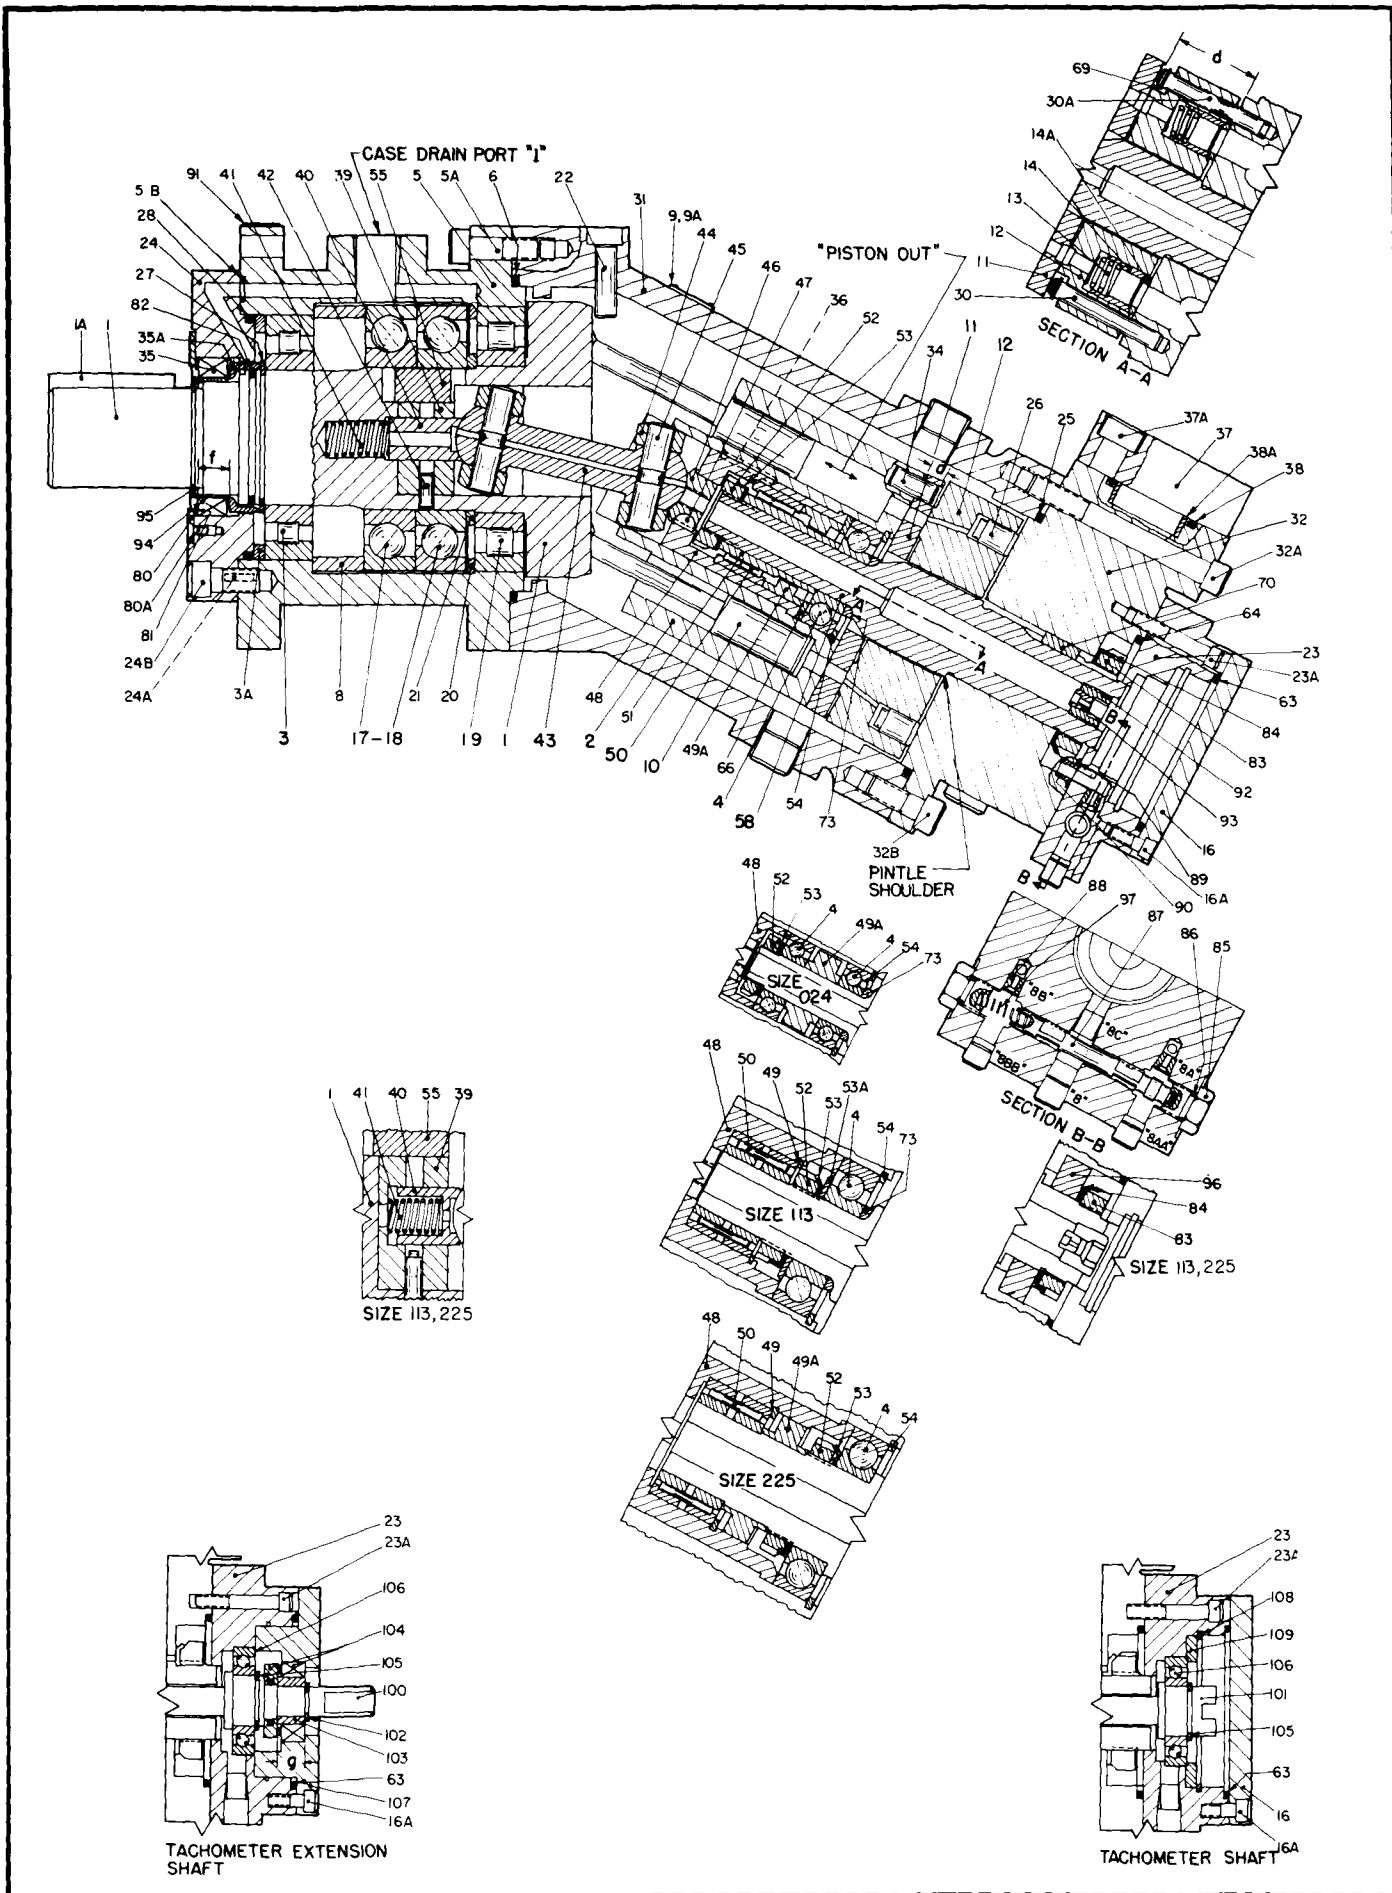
Parts Drawing, Oilgear "MFS" Constant Displacement Units. DS-956900C (503343C)
